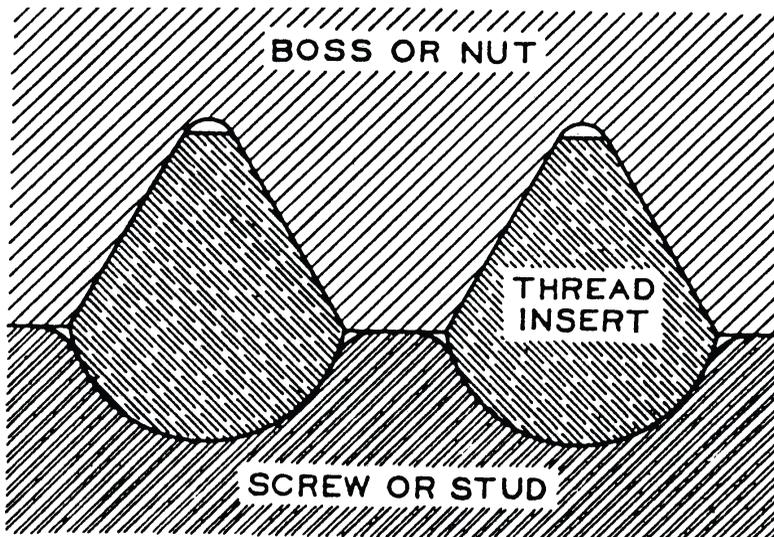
The Basic Thread Form Used in the Aero-Thread System
